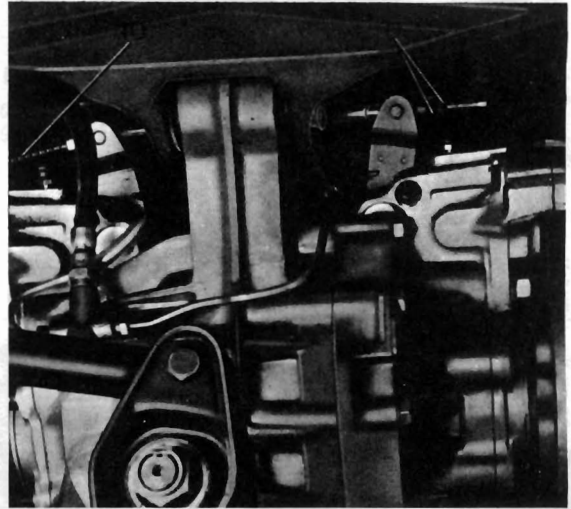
Handbrake cable connections to calipers (Sec 5)
